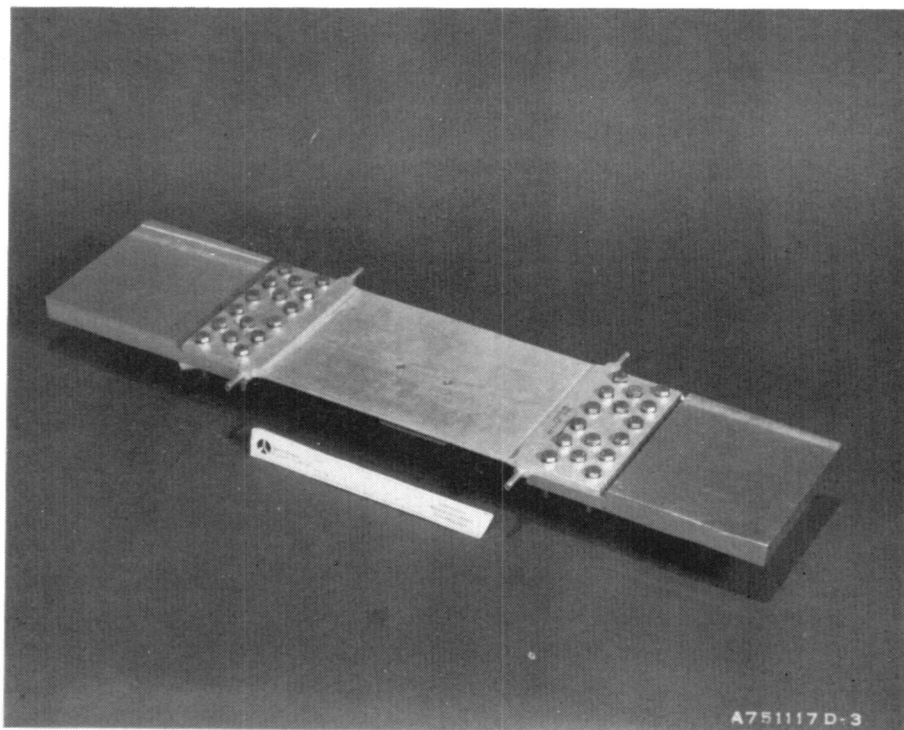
SIHS—Moldline Side of Panel with End-Load Adapters
